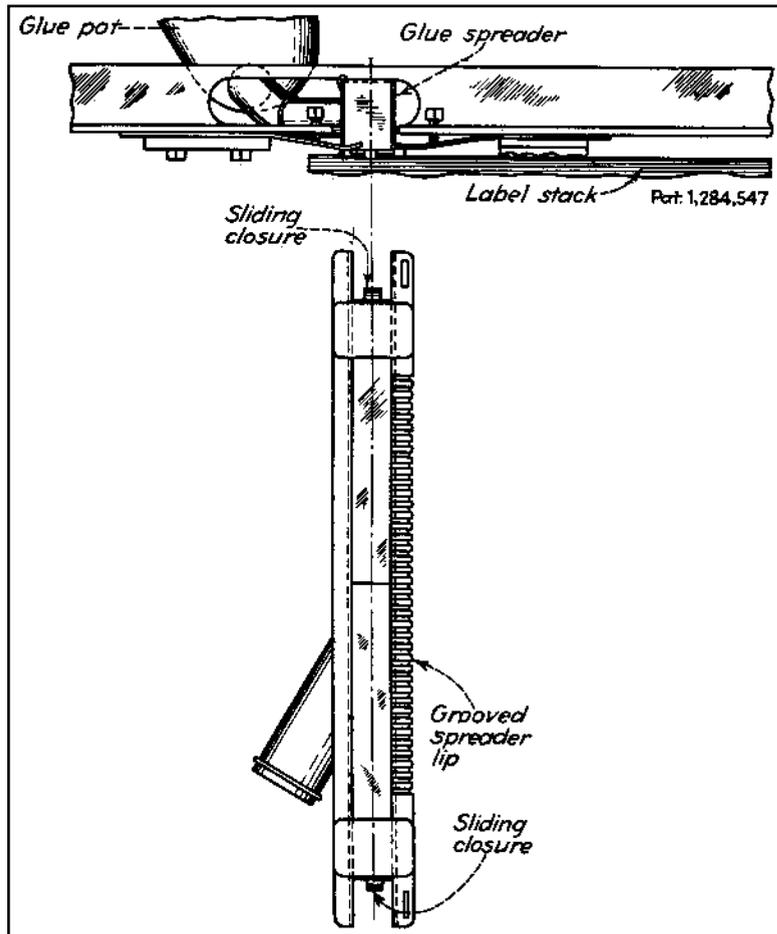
A gravity spreader has an open bottom and a grooved lip.
